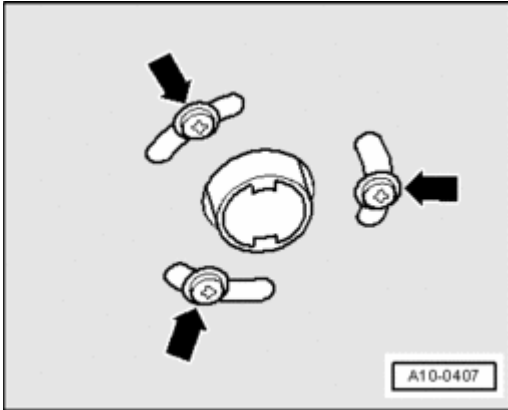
Removing Bolts Securing Exhaust Pipe Of Auxiliary/Additional Heater To Sound Insulation
